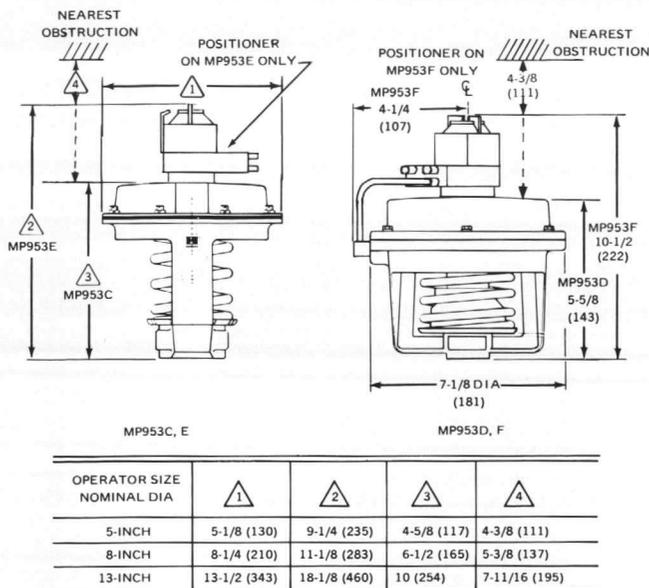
MP953C-F Dimensions in Inches (Millimeters).
